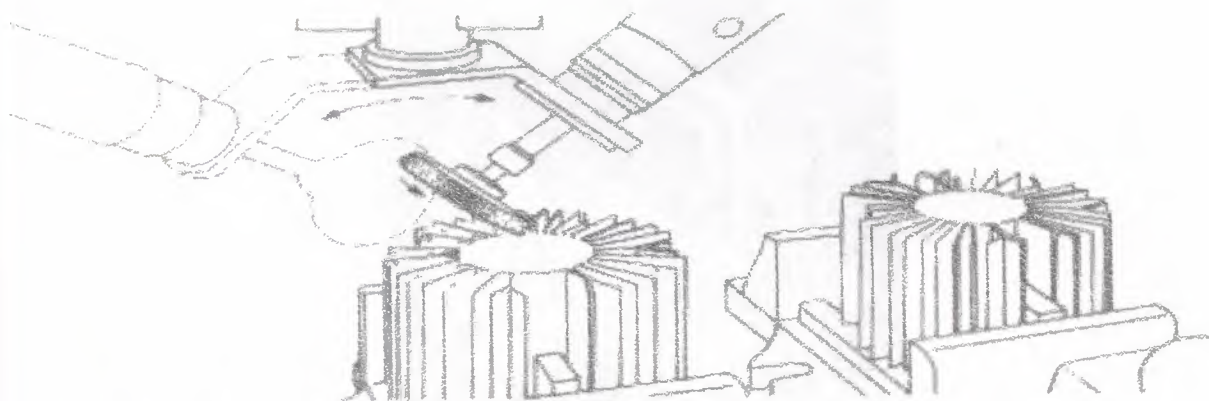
Robot used to perform a grinding operation. Depicted here is the smoothing of the top part of large heat sinks. (Courtesy of Unimation Inc., Westinghouse Company, Danbury, CT.)
